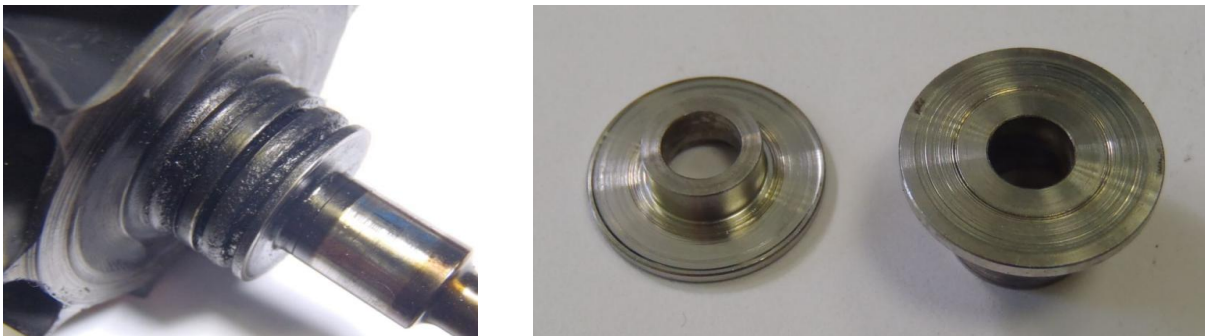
Damage of the groove, the seal ring and the longitudinal bearing pins
